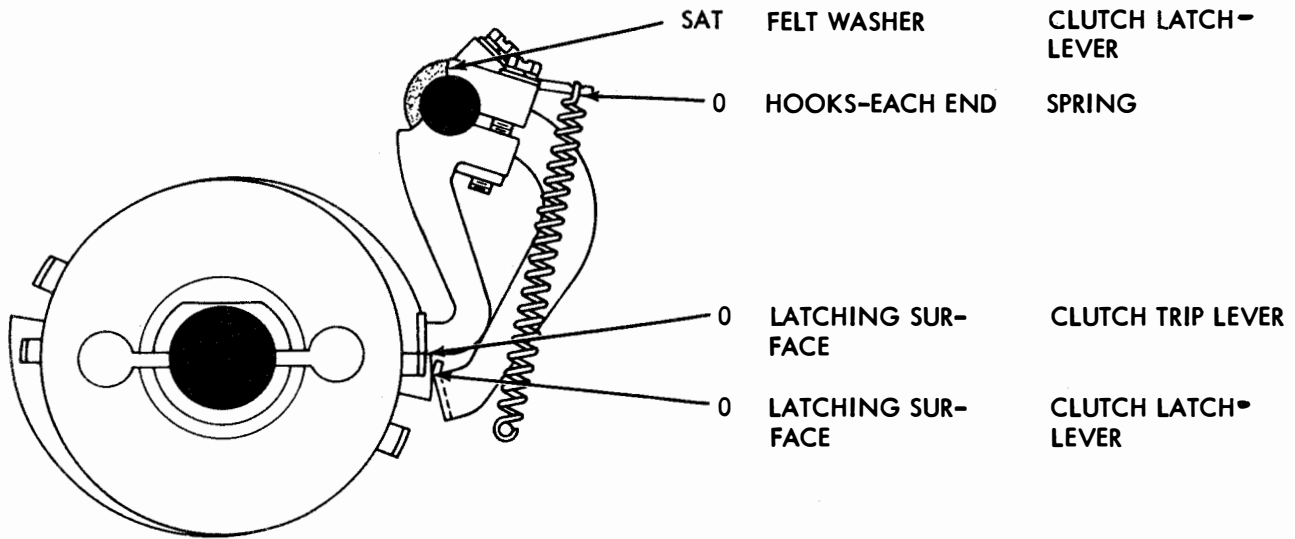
Perforator Clutch Mechanism (Non-Typing)
